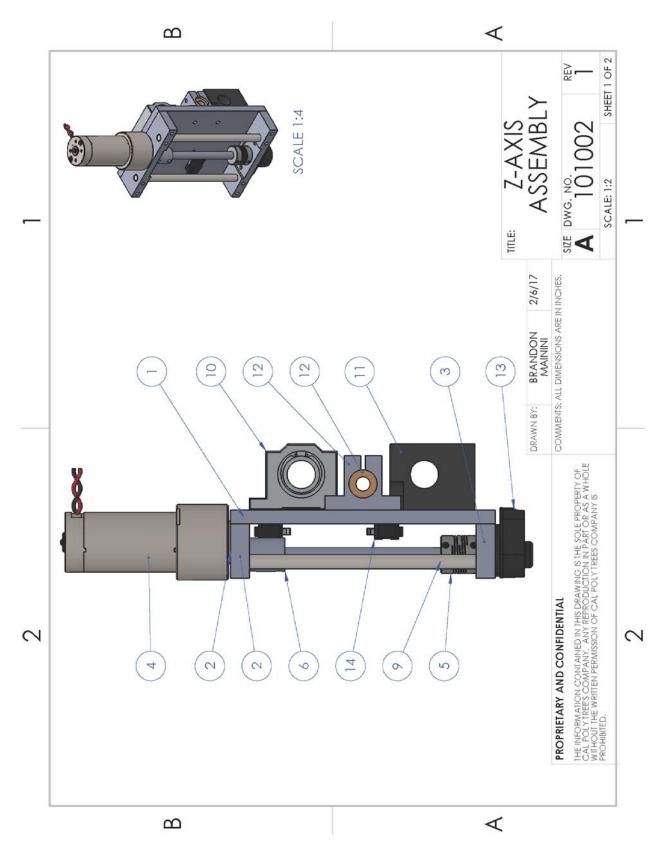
Z-Axis Assembly Detail Drawing (Page 1 of 2)
